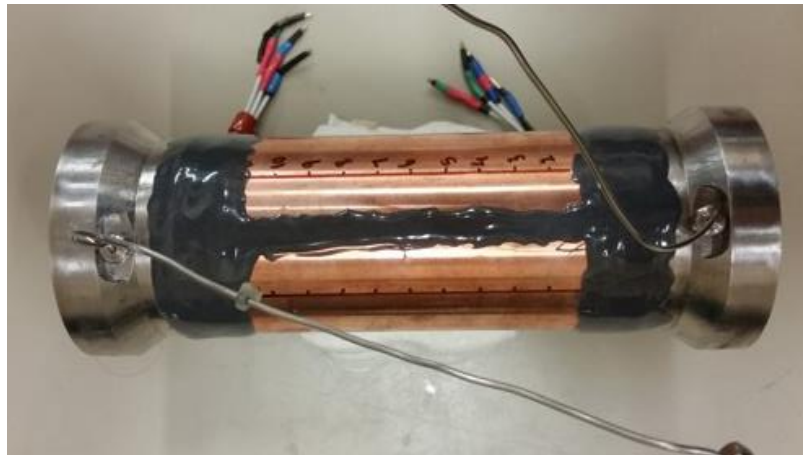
Welding the Closing Line of Copper Sheet
